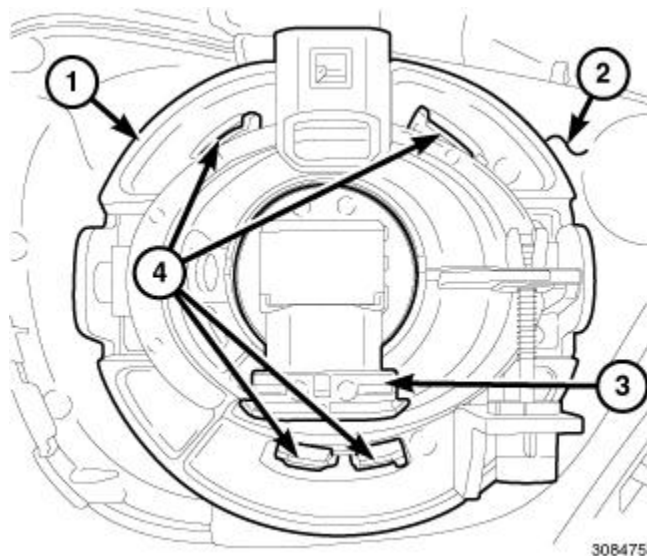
Front Fascia, Connector Receptacle, Latch Features & Front Fog Lamp Mounting Ring
